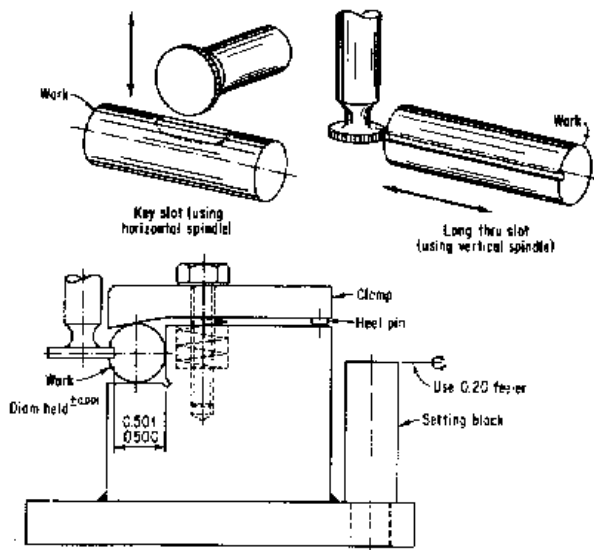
Methods of milling key slots and vertical milling fixture.
